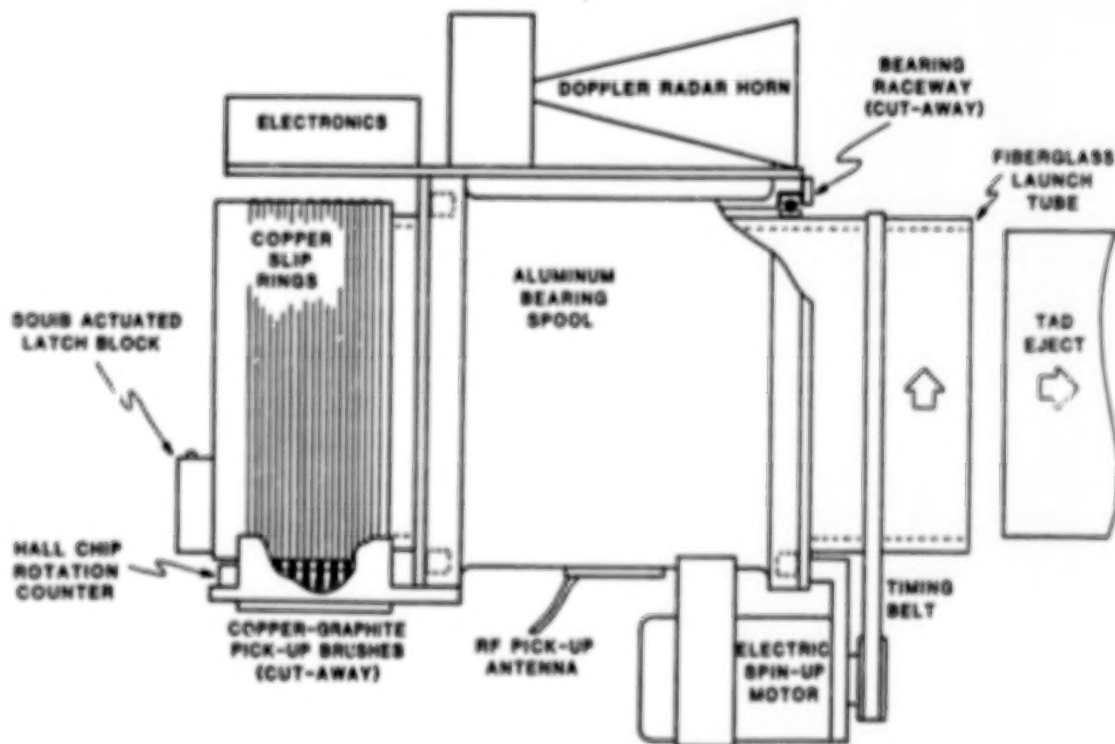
Echo 6 Spin-Up Assembly Sectional View
